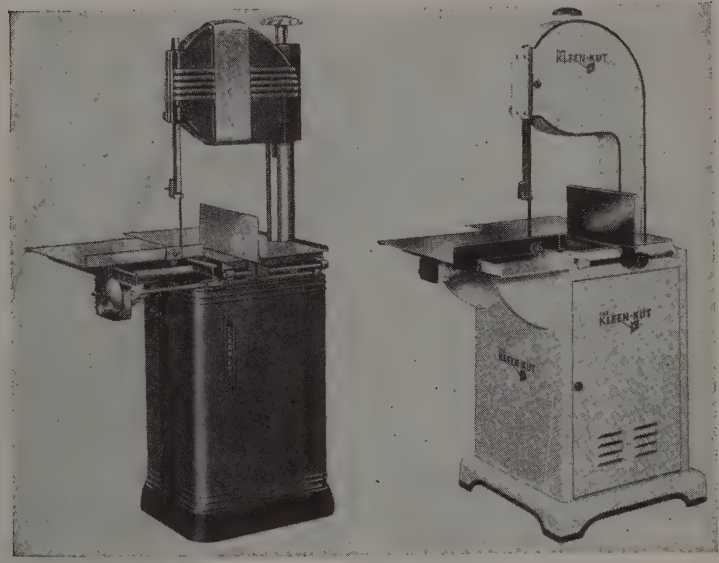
Saw of former conventional design (left) and all-welded design (right).
